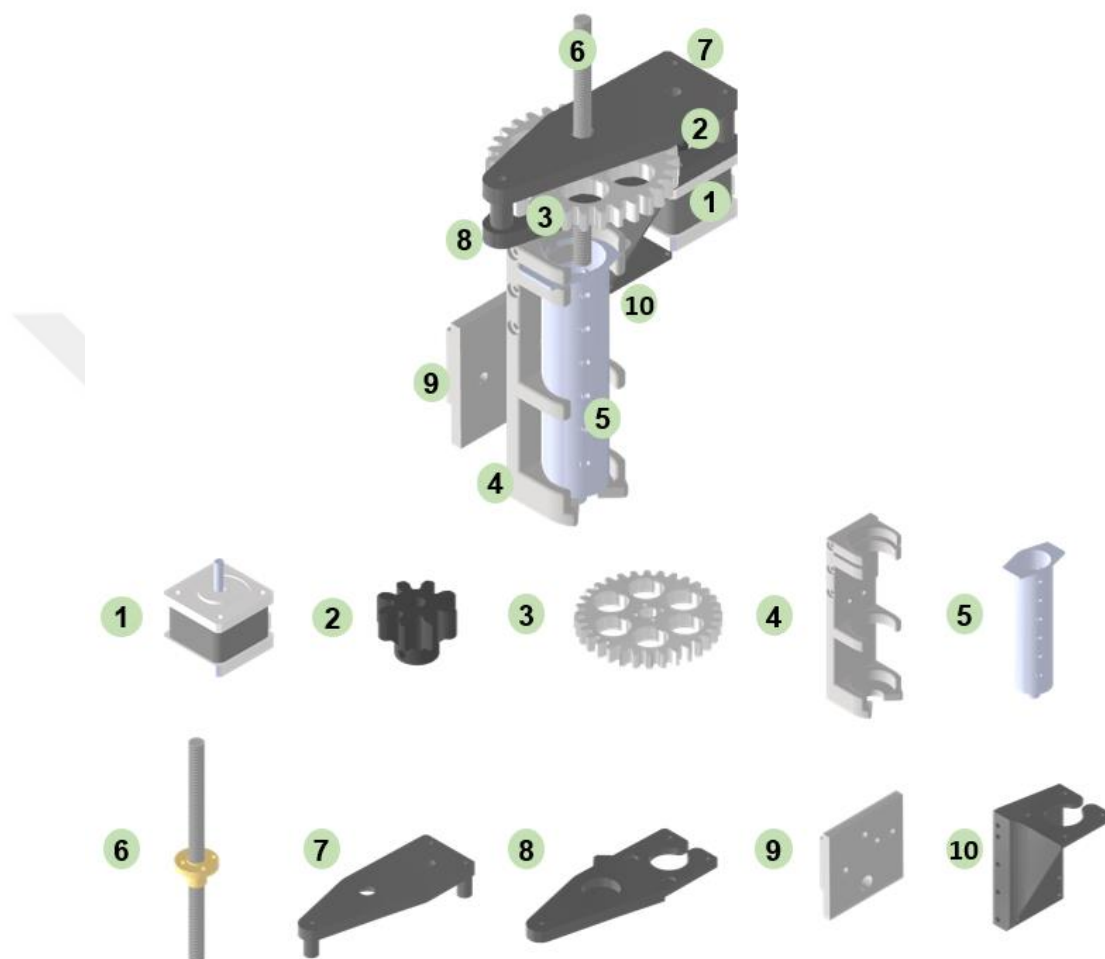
Syringe pump parts. 1) Stepper motor. 2) Driving cog. 3) Driven cog. 4) Syringe holder. 5) Syringe. 6) T8 Lead Screw. 7) Upper cog holder. 8) Lower cog holder. 9) Backplate. 10) Motor mount. Parts 2,3,4,7,8,9 & 10 were 3D printed with an Ultimaker 2+.
